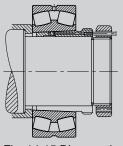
Dismounting of Withdrawal Sleeve by using Hydraulic Pressure
